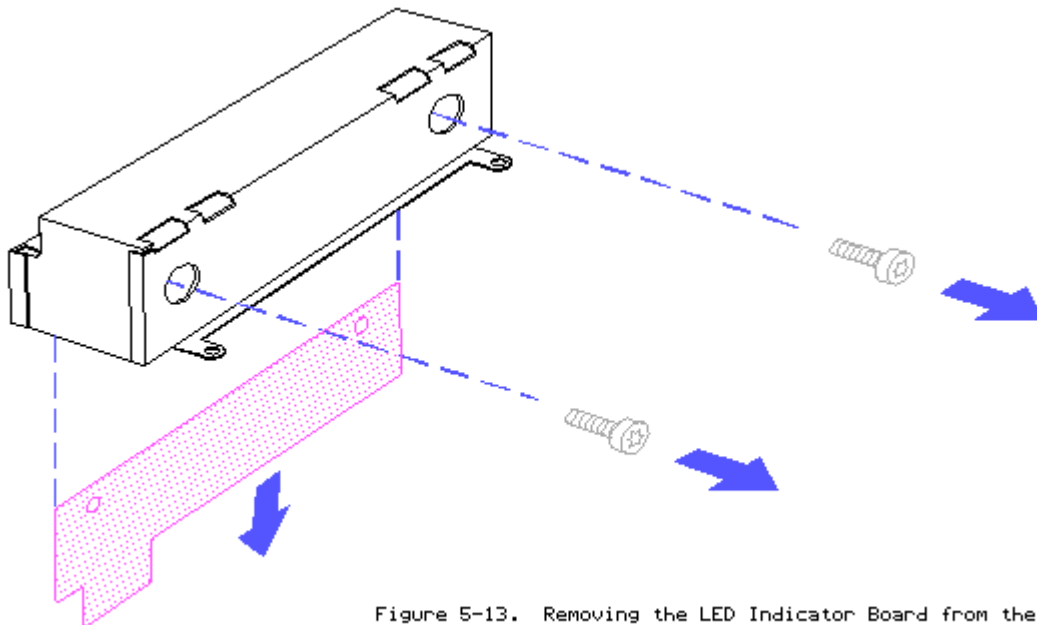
Removing the LED Indicator Board from the COMPAQ SLT/286
